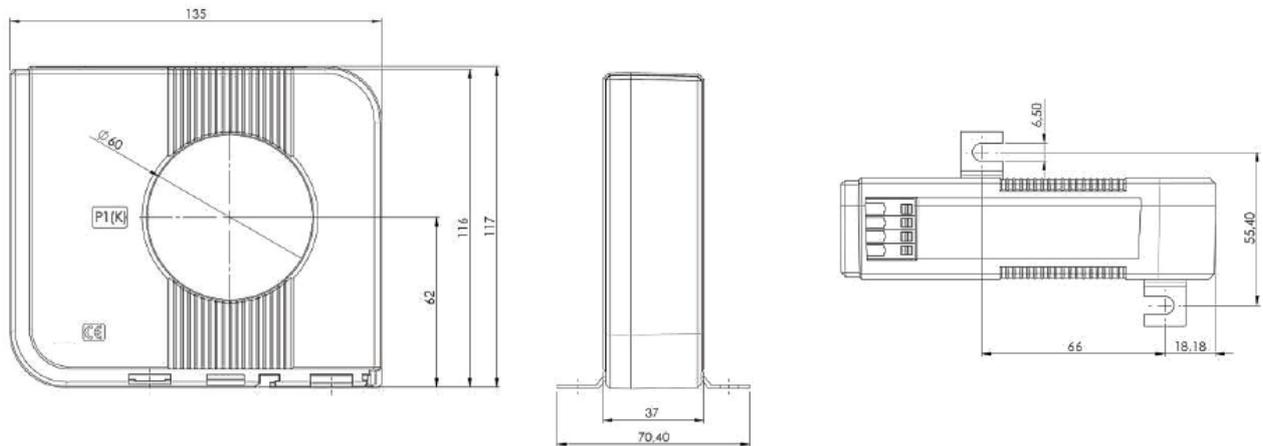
SCT4316-0025 dimensions, all dimensions in mm
